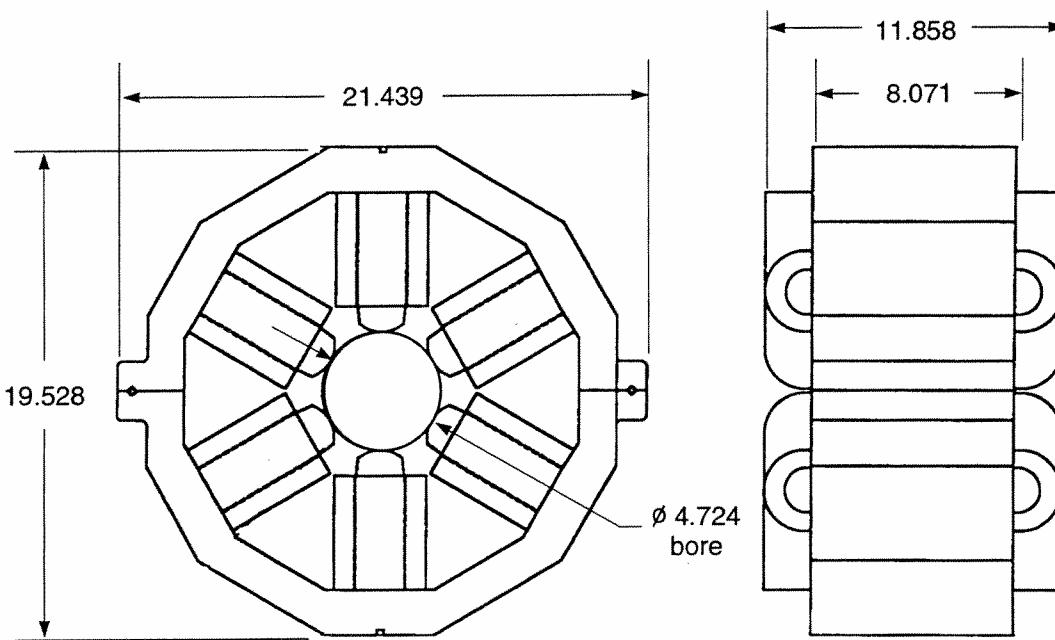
End and side views of a PEP/HER sextupole magnet. Dimensions are given in inches.
